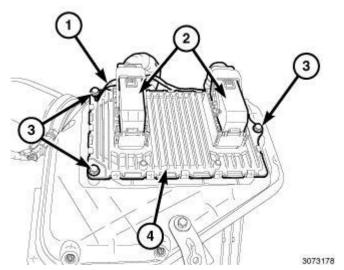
Electrical Connectors, PCM, Three Mounting Bolts & Ground Wire Courtesy of CHRYSLER GROUP, LLC
